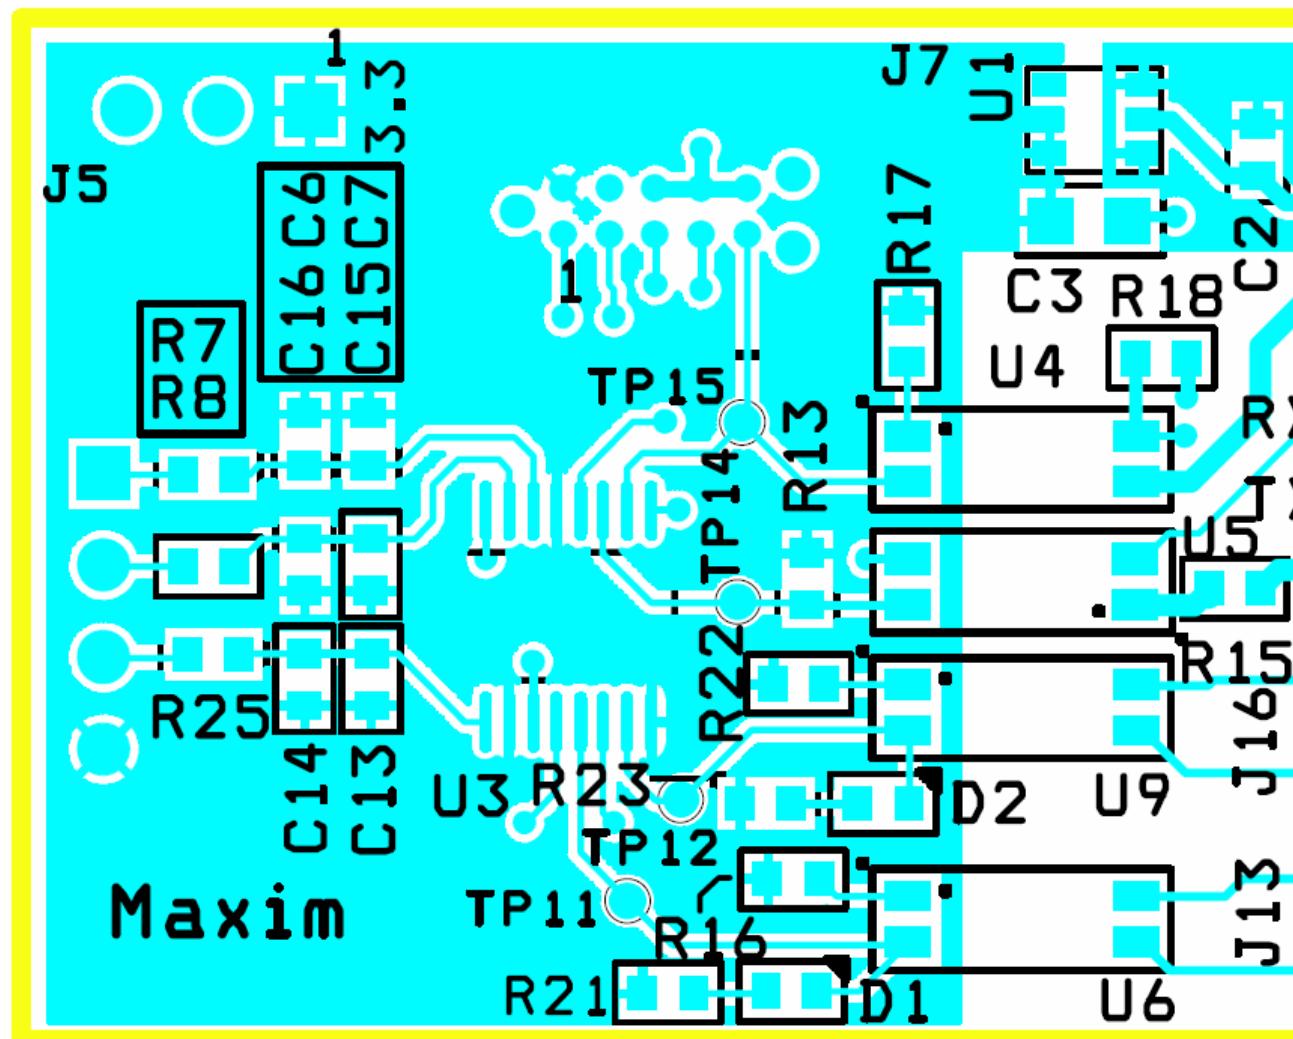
78M6610+PSU 16-Pin Evaluation Board PCB Top View
